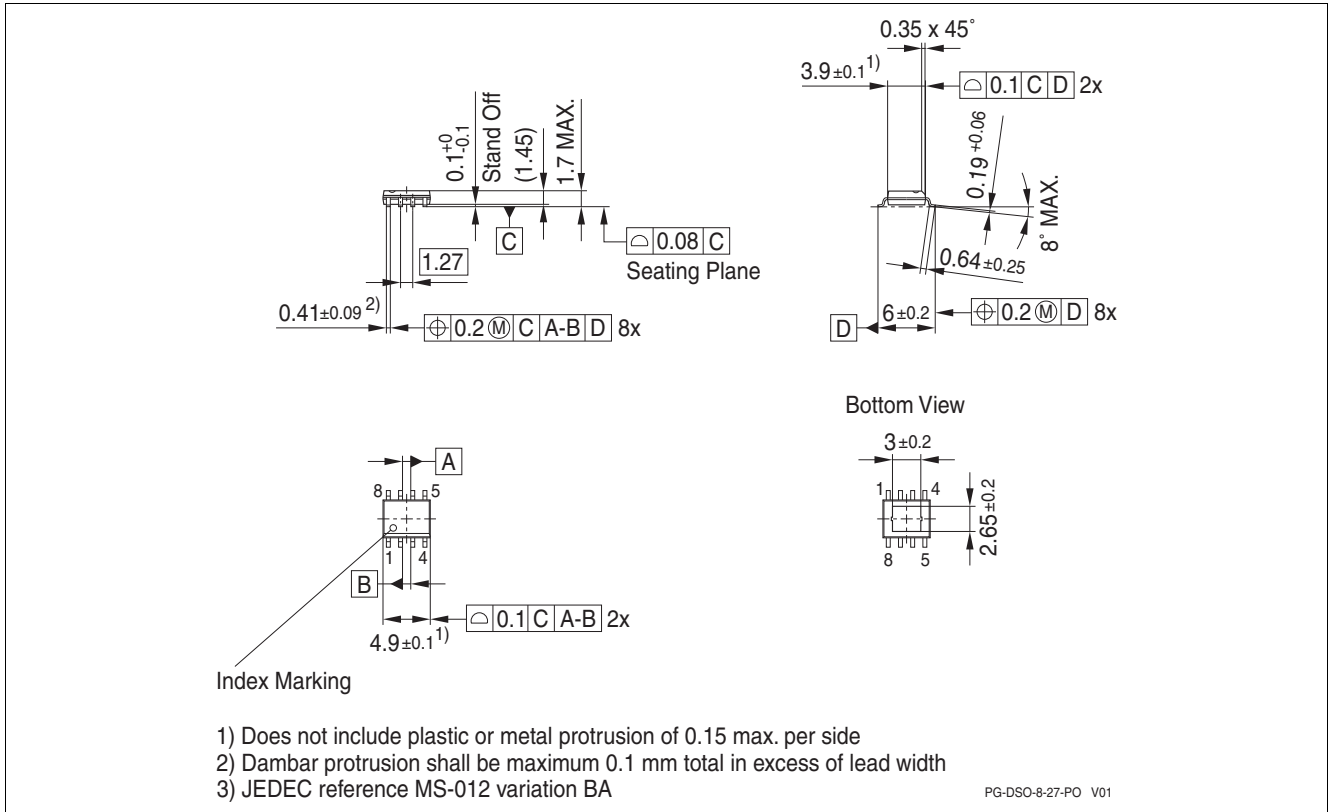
Package outline PG-DSO-8-27 (dimensions in mm)
